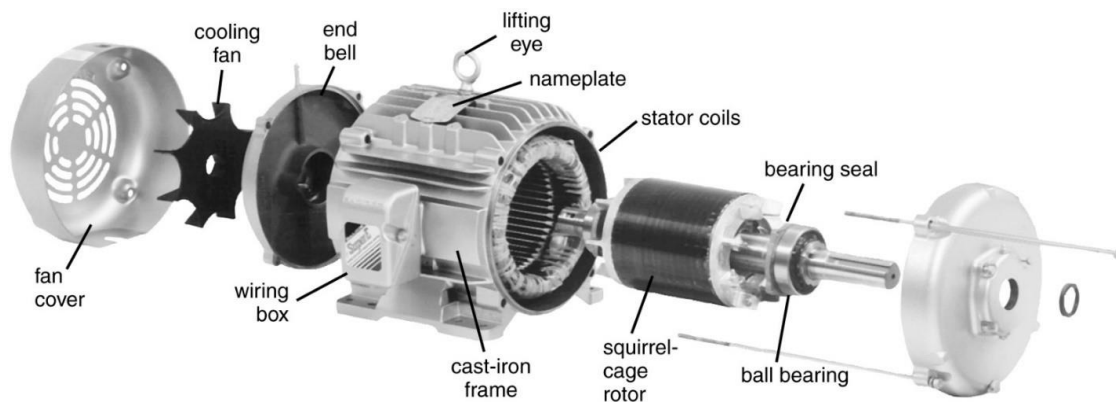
An exploded view of a squirrel-cage type induction motor [5].
